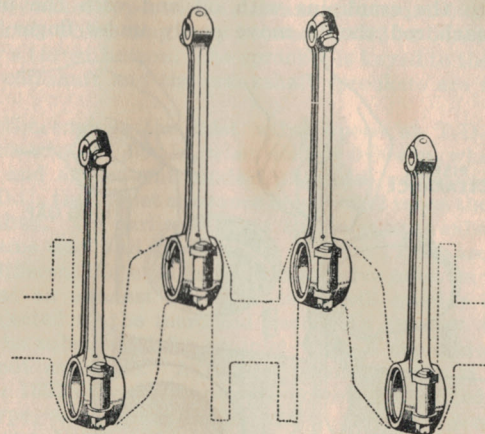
THE ORDER OF ASSEMBLING THE CONNECTING RODS ON LATER ENGINES. NOTICE THE ALTERNATING POSITIONS OF THE GUDGEON PIN CLAMPING BOLTS
